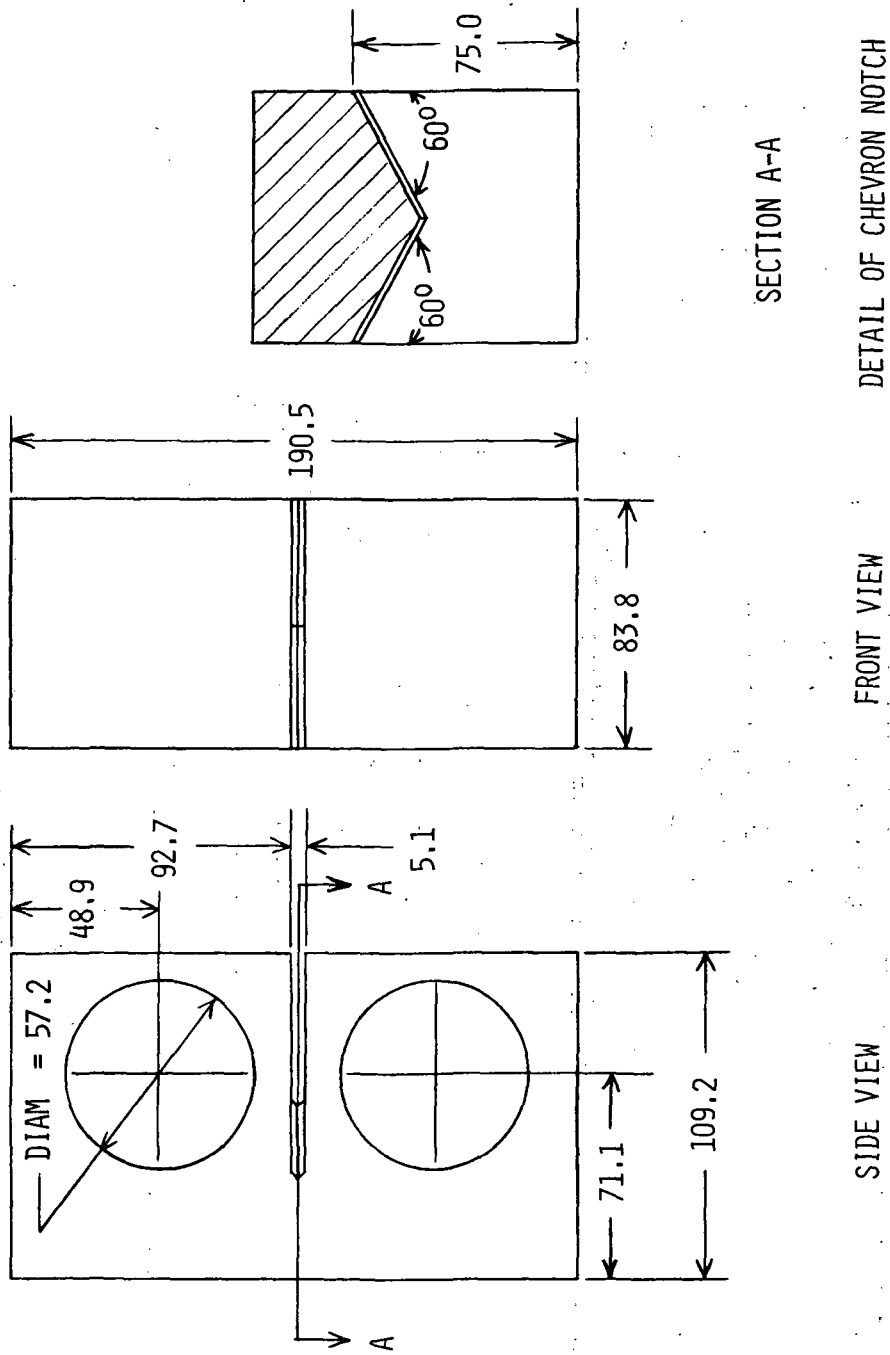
Compact specimen configuration. All dimensions in mm. Specimen width, 71.1 mm.
